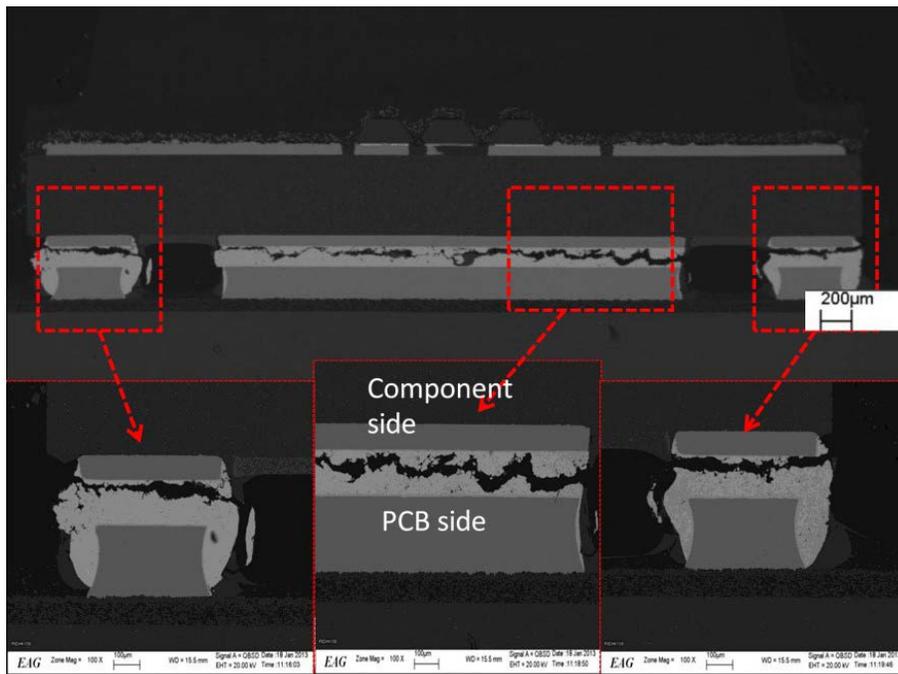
Cross-sections of failed solder joints imaged by a scanning electron microscope, showing cracking propagating along the plane of the joint
